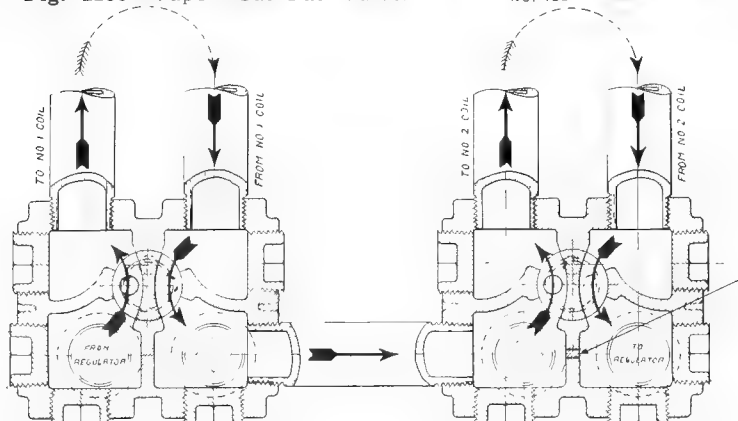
Section Through Vapor Cut-Out Valves Arranged in Multiple. Chicago Car Heating Company.
